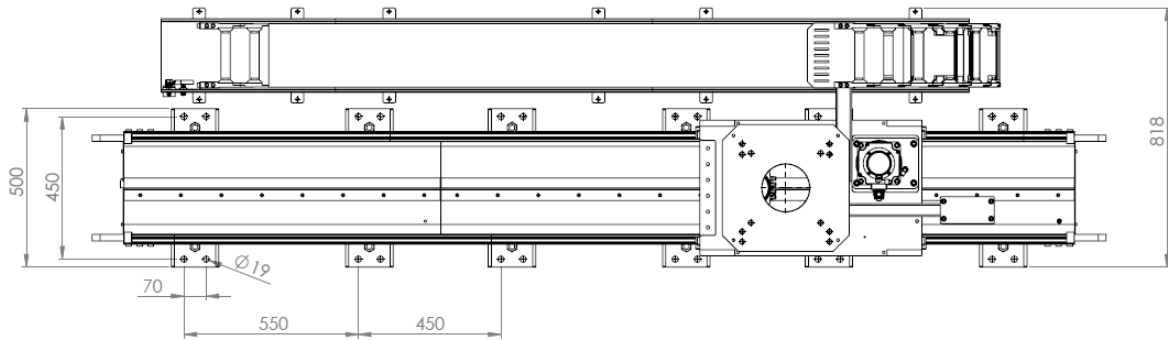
Basic dimensions of the linear track with spacing of fixing holes.
